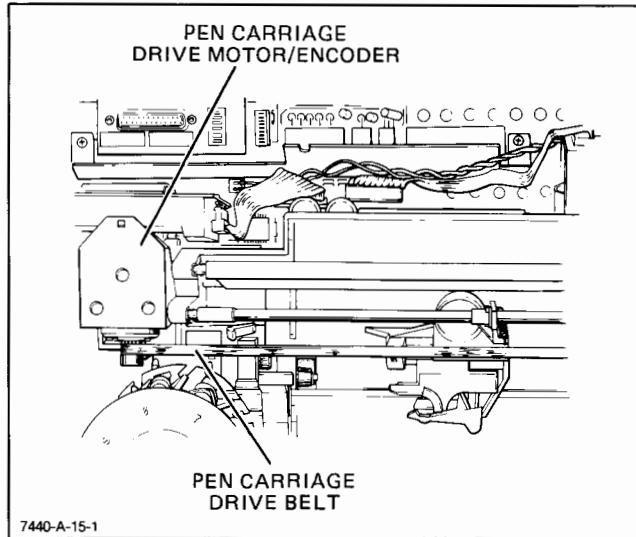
Pen Carriage Drive Motor/Encoder Assembly Removal, Detail B
